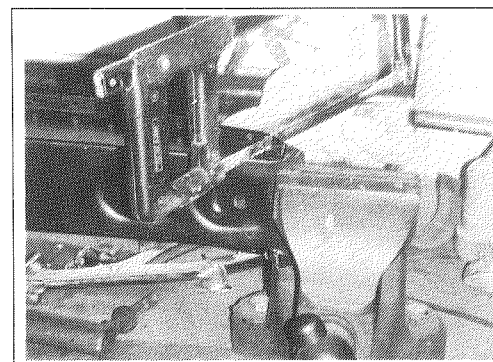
A couple of hacksaw cuts will help when you come to final welding. Trial fitting will show any adjustments you will have to make.
